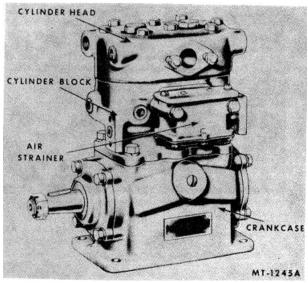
Exterior View of Tu-Flo 400 and 500Compressor
